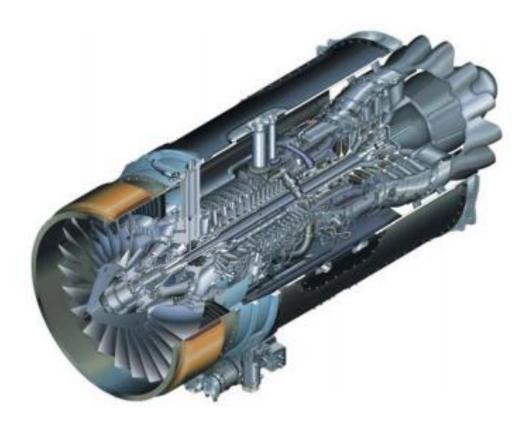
Cutaway view of an AE 3007 engine. Moly coatings are generally used for a range of applications in the "cold" sections of a gas turbine.
